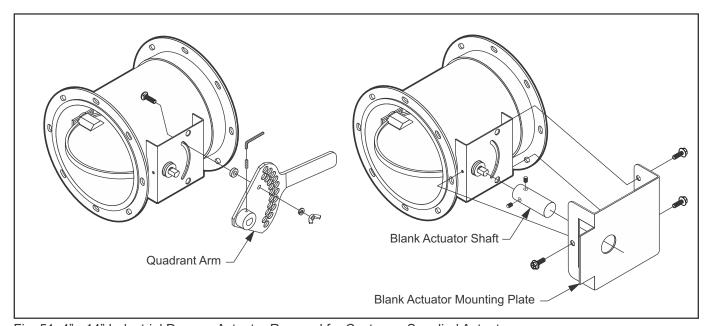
4" - 14" Industrial Damper Actuator Removal for Customer Supplied Actuator.
